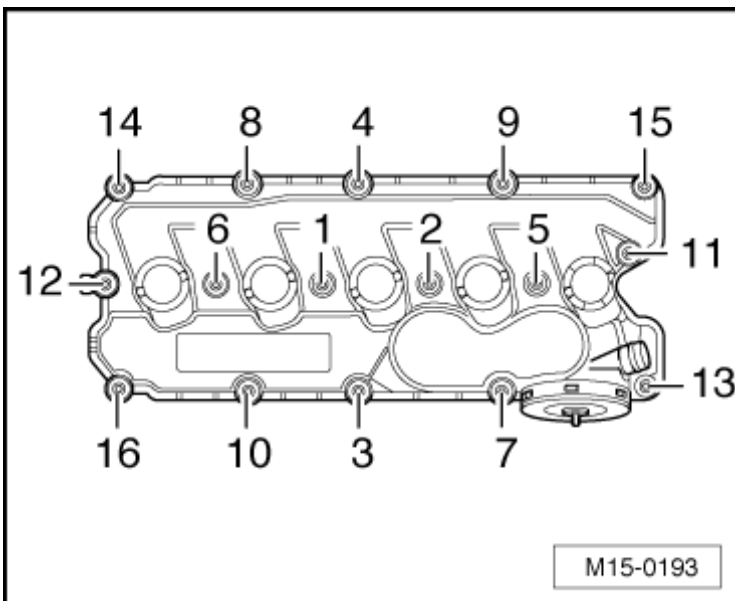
Identifying Cylinder Head Cover Bolt Removal Sequence
